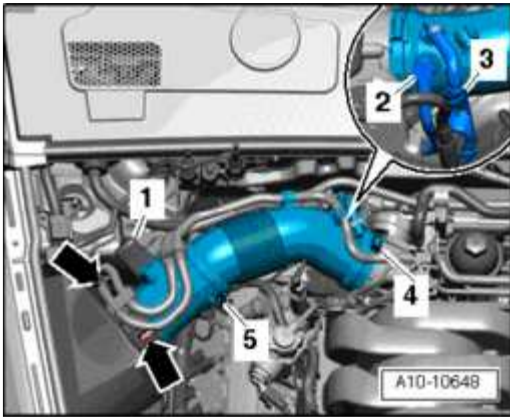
Identifying Electrical Harness Connector, Clips, And Hose Clamp
